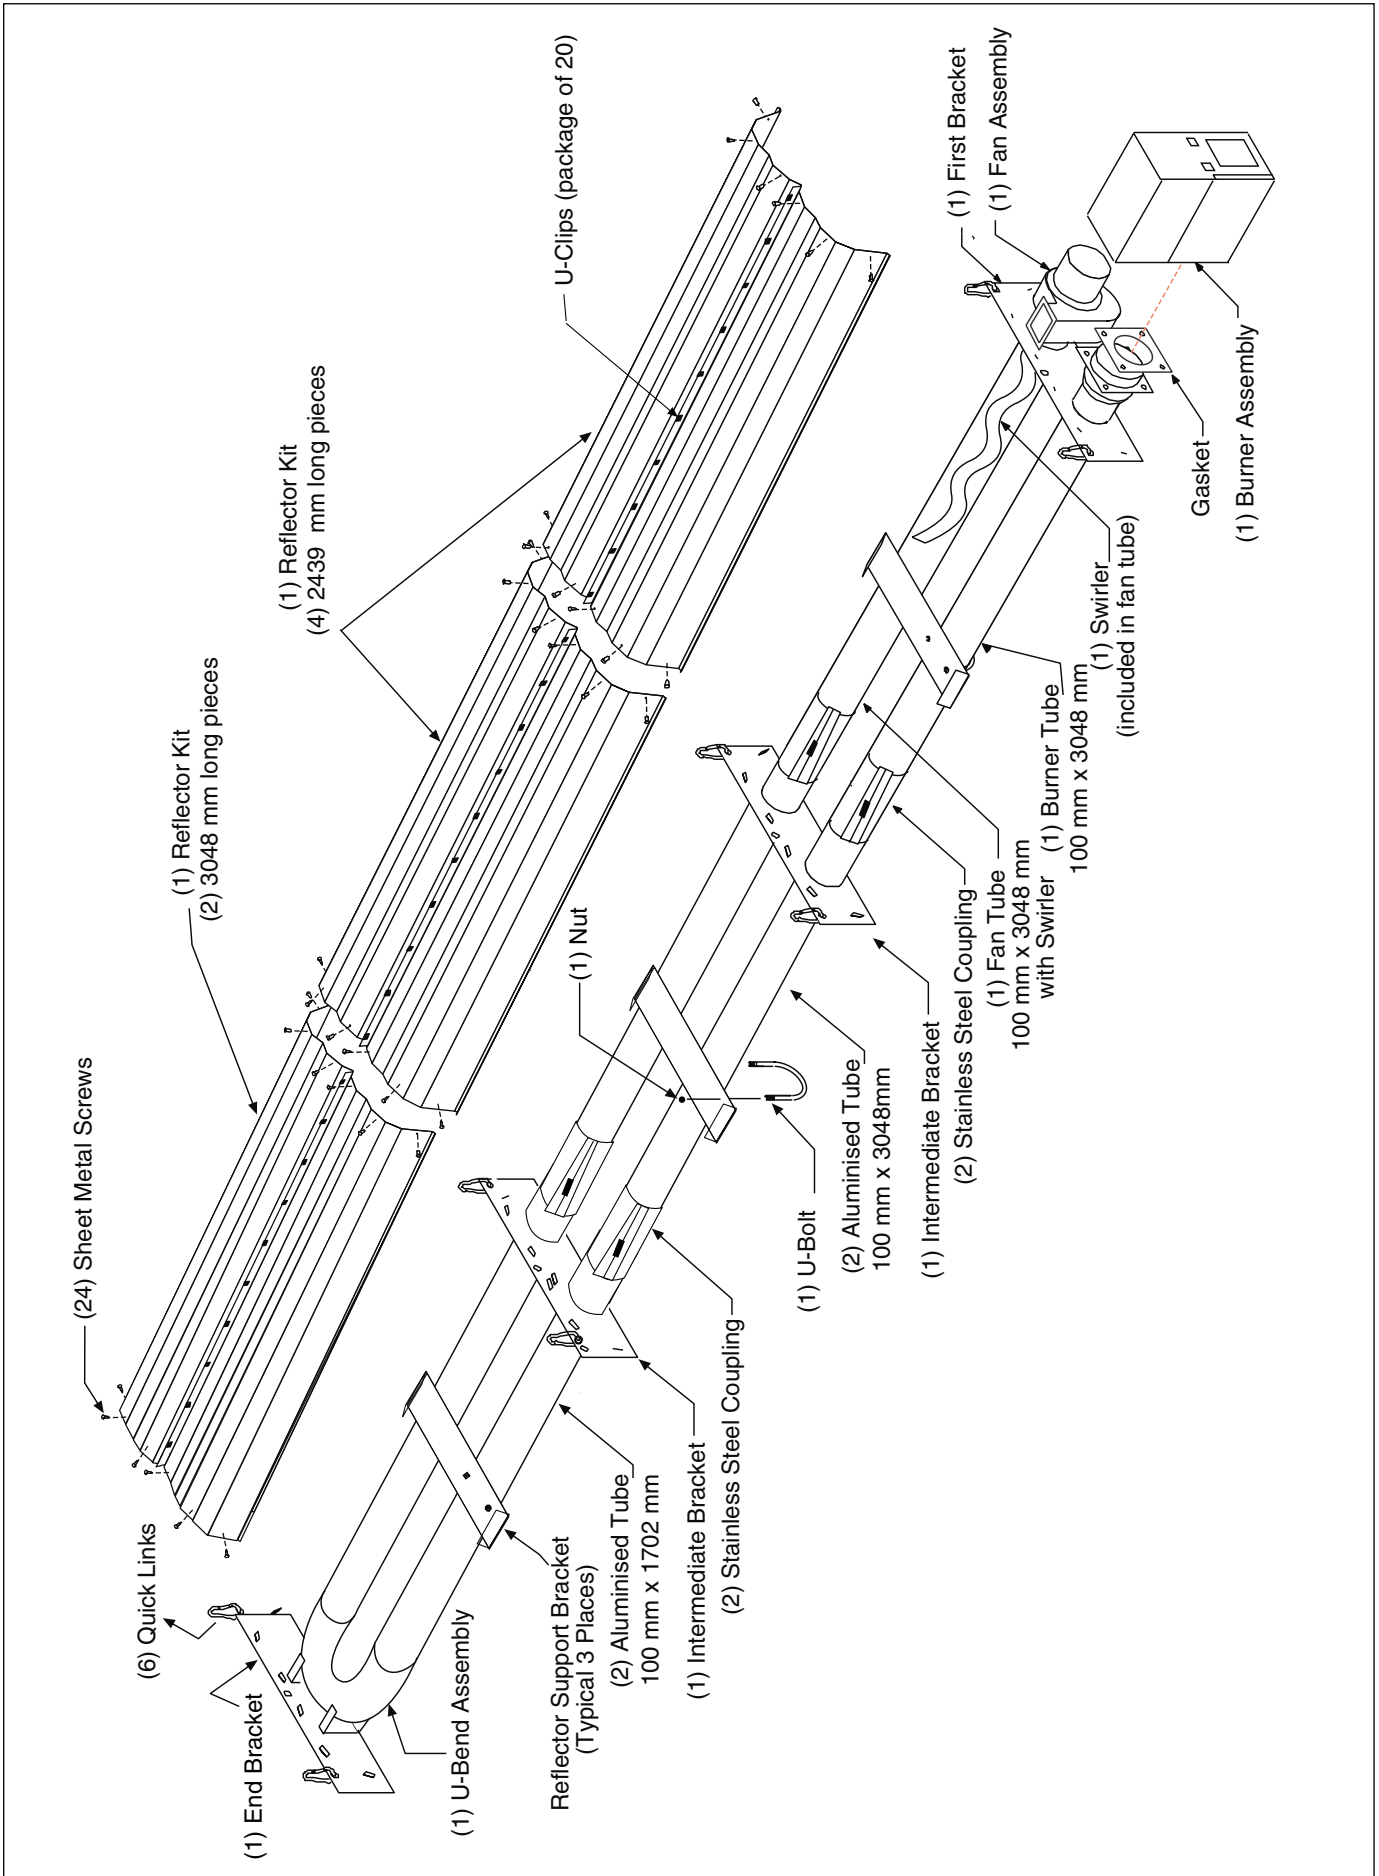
Model BH45UT/BH50UT U-Tube Assembly
